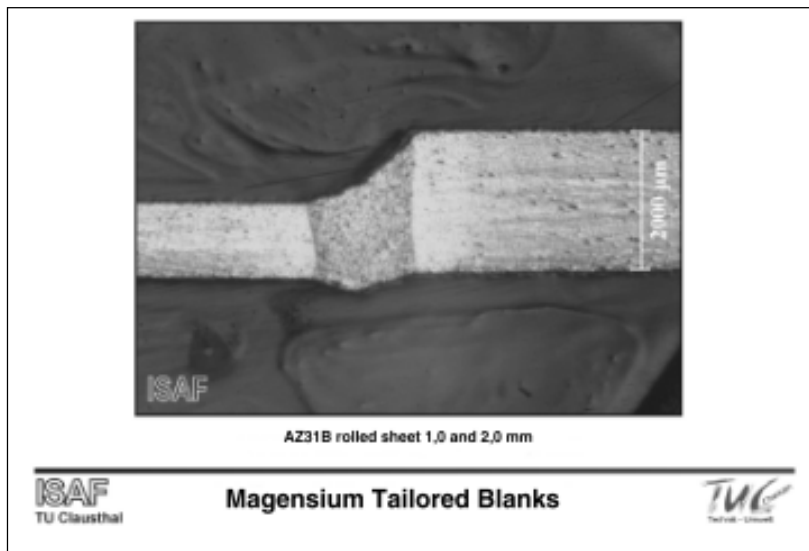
Cross-sectional view of an Nd:YAG laser-welding
